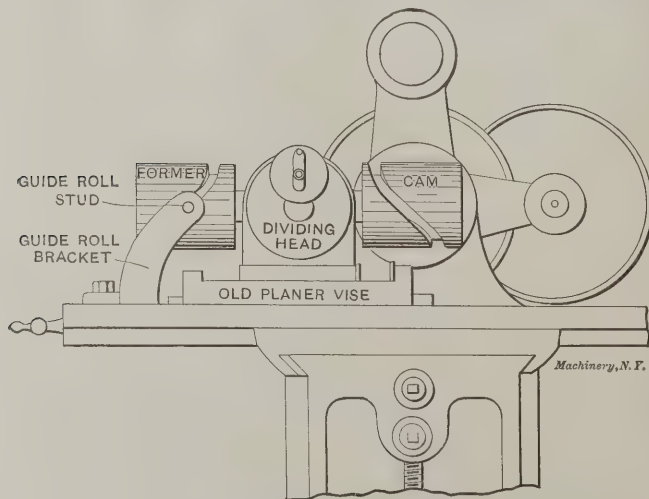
Cutting a Cylindrical Cam with the Rig shown in Fig. 2.
